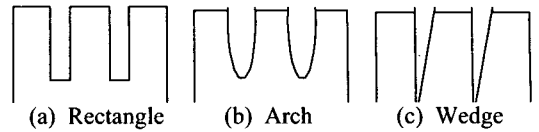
Cross section view of pad (Groove profile); (a) rectangle type, (b) arch type, (c) wedge type
